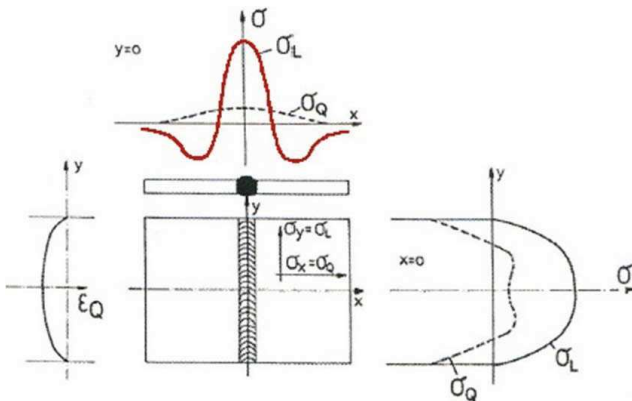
Longitudinal and transverse residual stresses along line Y parallel to the weld seam and along line X perpendicular to the weld seam. The model is applicable for a single-pass welding process of a sufficiently thin sheet [Macherauch 1977].
